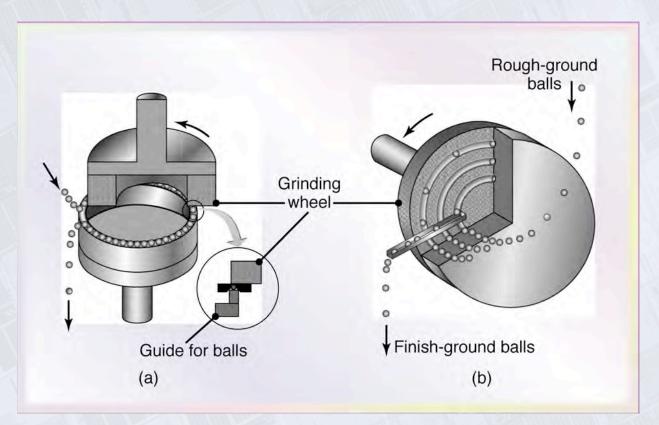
(a) Rough grinding of steel balls on a vertical-spindle grinder. The balls are guided by a special rotary fixture. (b) Finish grinding of balls in a multiple-groove fixture. The balls are ground to within 0.013 mm (0.0005 in.) of their final size.
